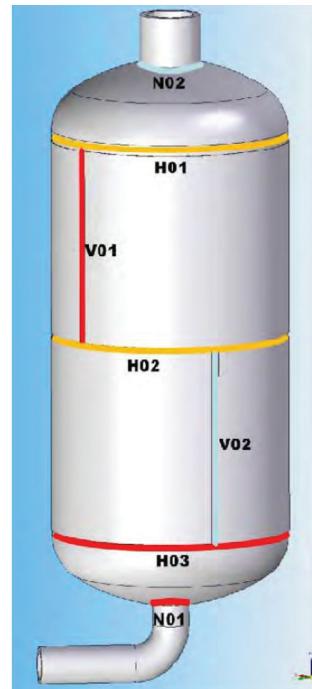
Weld ID used in the inspection and FFS assessment.
